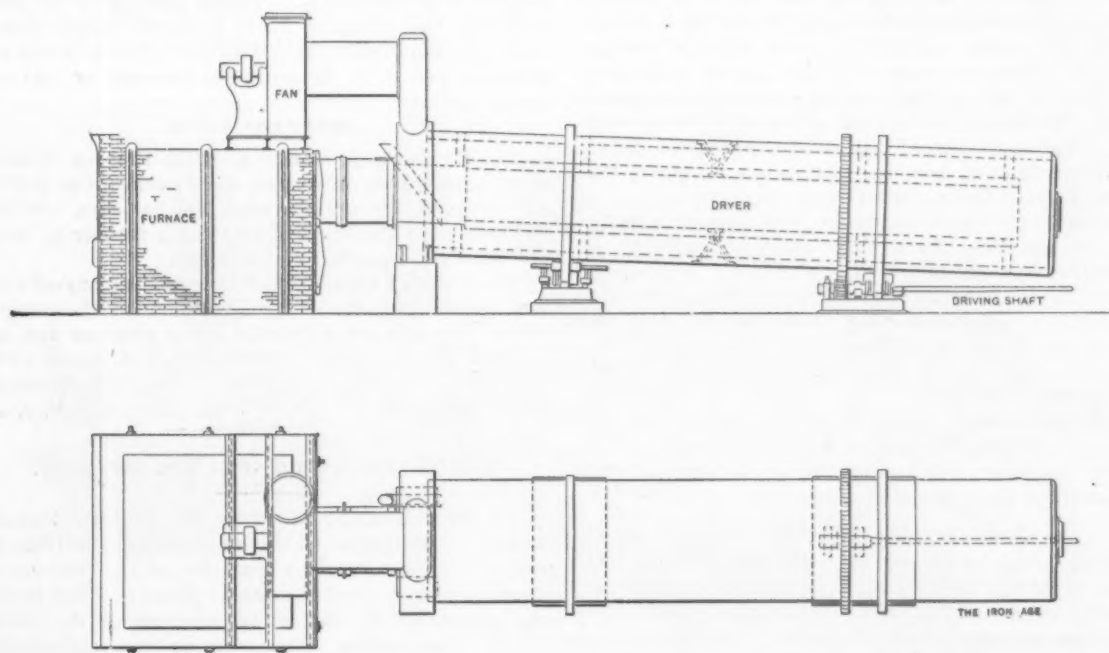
Plan and Side Elevation of One of the Ruggles-Coles Dryers, Showing Connection of Fan and Furnace.
